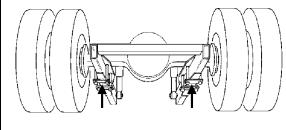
JACKING POINTS ON DRIVE AXLE
